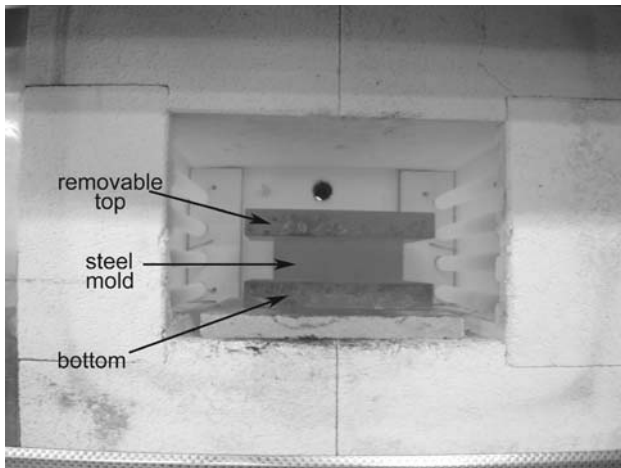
Foaming in the furnace with a steel mold closed at the top and bottom.
